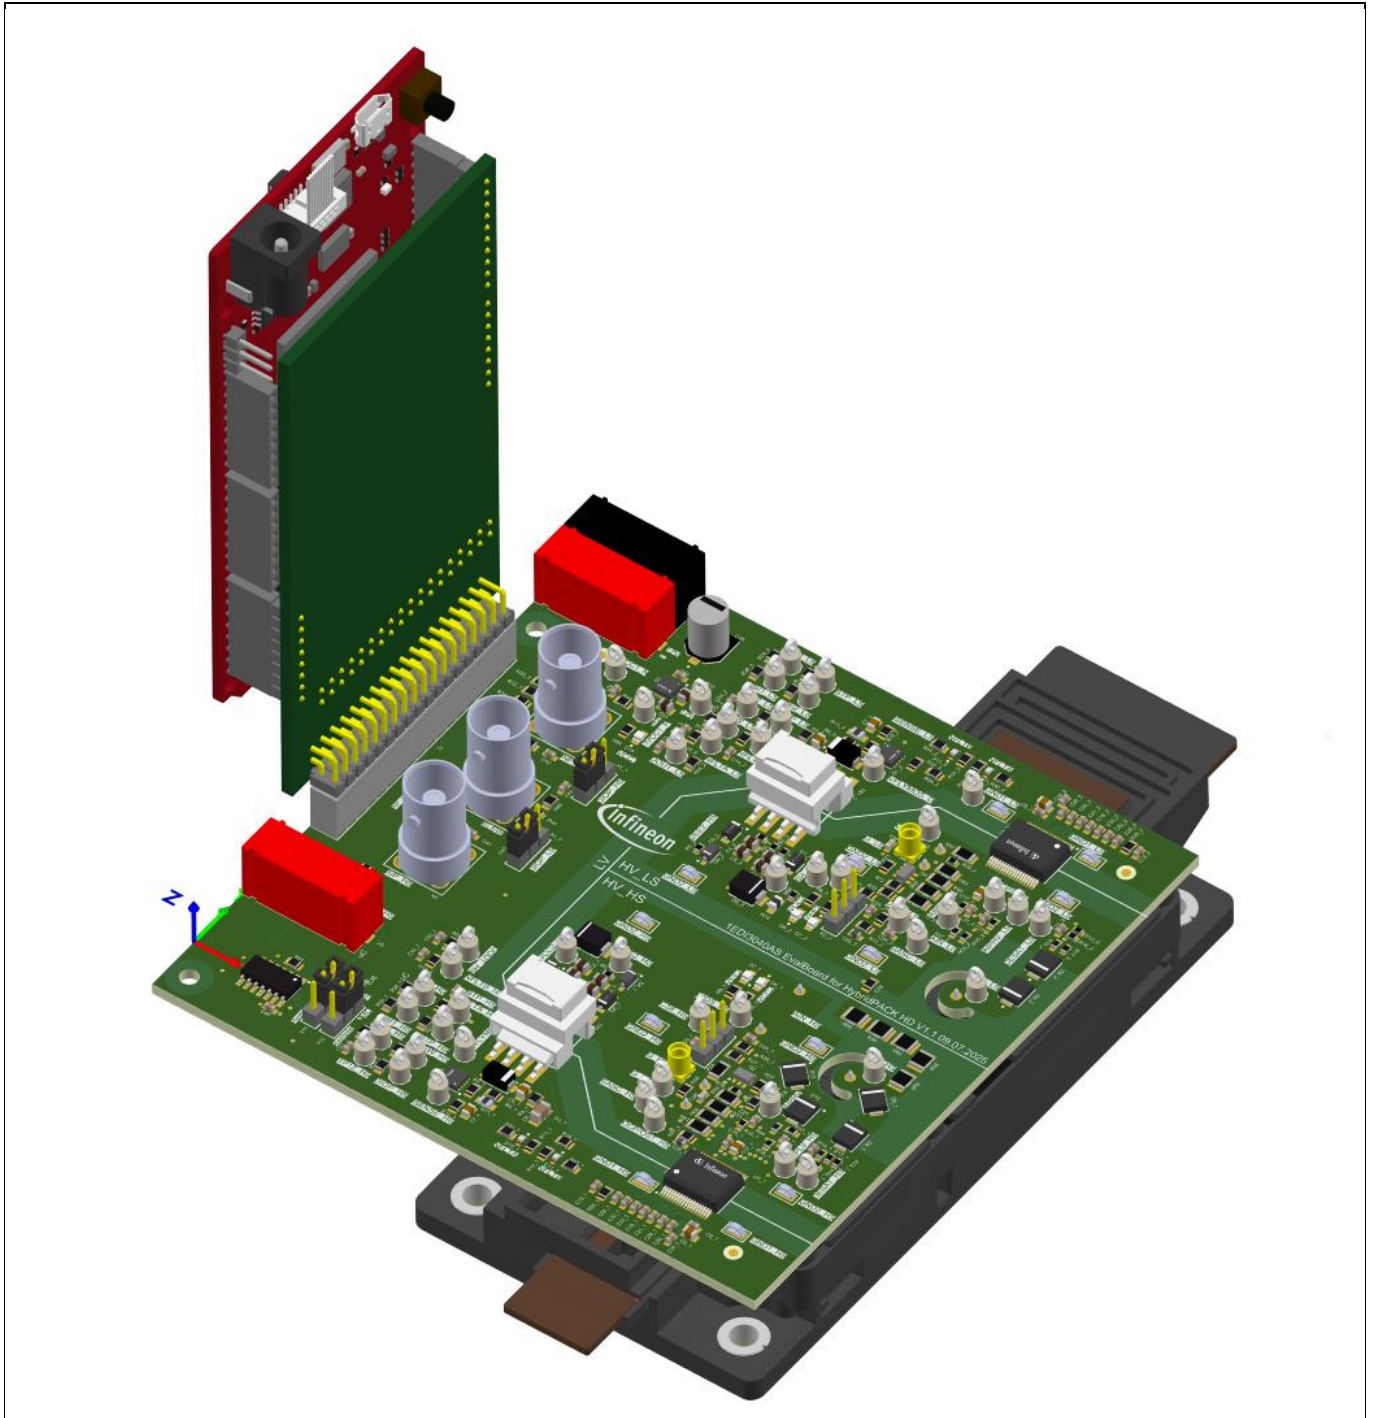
EiceDRIVER™ gate driver 1EDI3040AS HybridPACK™ HD evaluation board with base board
